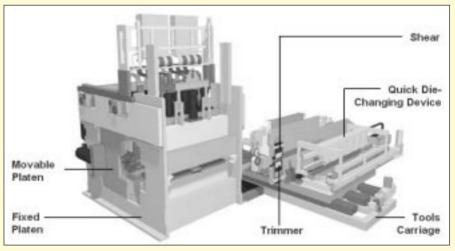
Schematic Diagram of the Flash Butt Welder 21.
